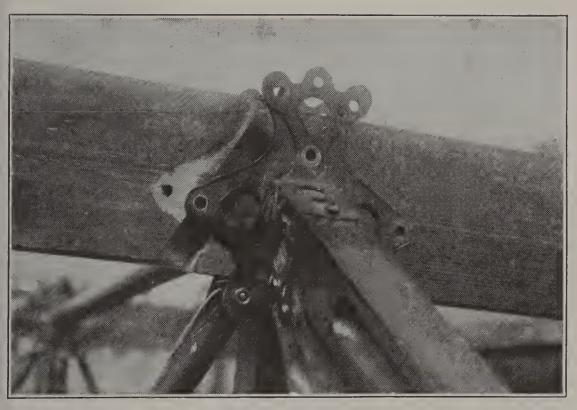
SPLICE IN SIDEWALK BEAM WITH STARBOARD PIECE PARTLY REMOVED.
